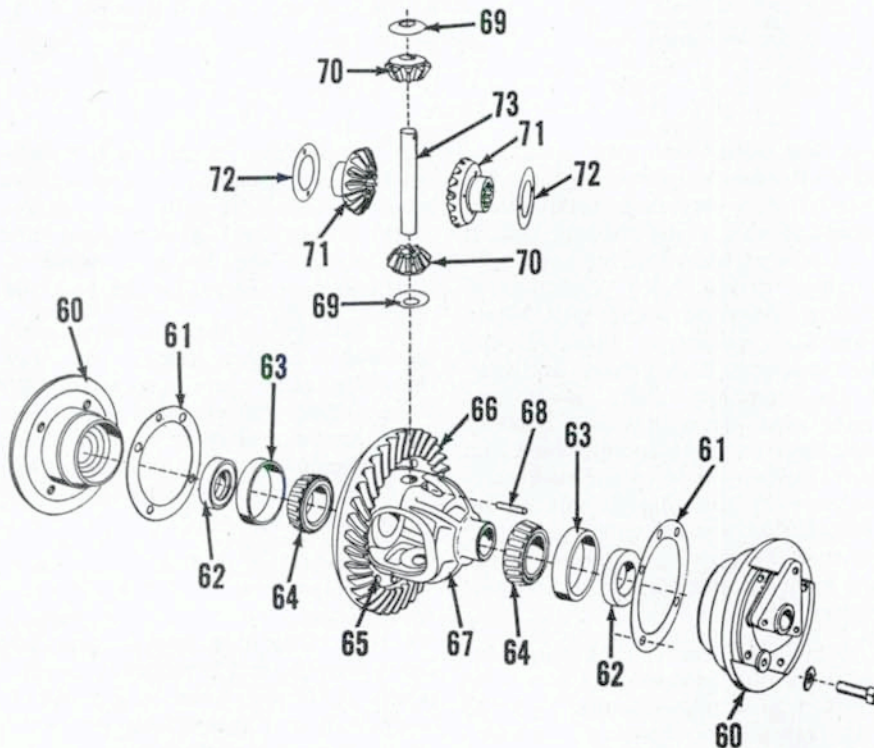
Exploded view of the D-14 and D-15 differential unit including the bearing carriers (60). The main drive bevel gear backlash adjustment is accomplished by transferring shims (61) from under one bearing carrier (60) to the other as required to obtain the desired backlash of 0.007-0.012.
